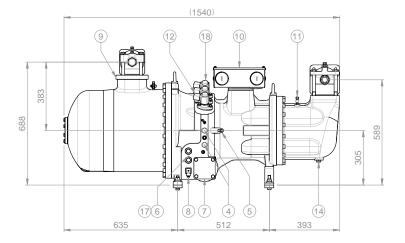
dimensional drawing of the models: ES3-L070/L080/L090/L100
